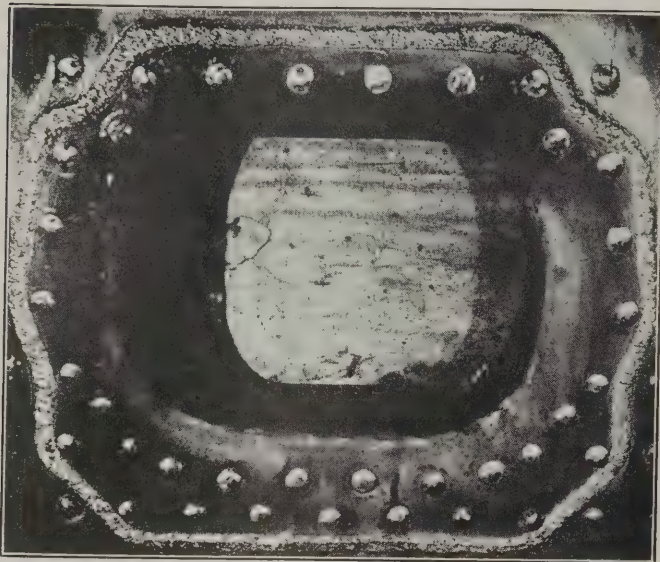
Showing Practice of Welding in a Door Hole Collar
